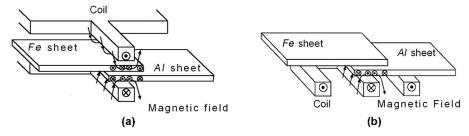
a) MPW coil structure where a) is a double layer, H shaped flat coil , and b) is one layer E shaped flat coil taken from Ref. /13/
